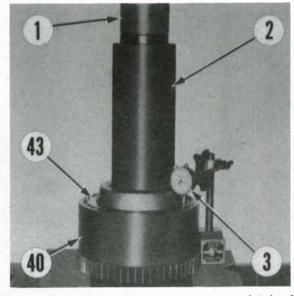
Use a dial indicator to measure clutch plate clearance. Refer to text for adjustment procedure.
